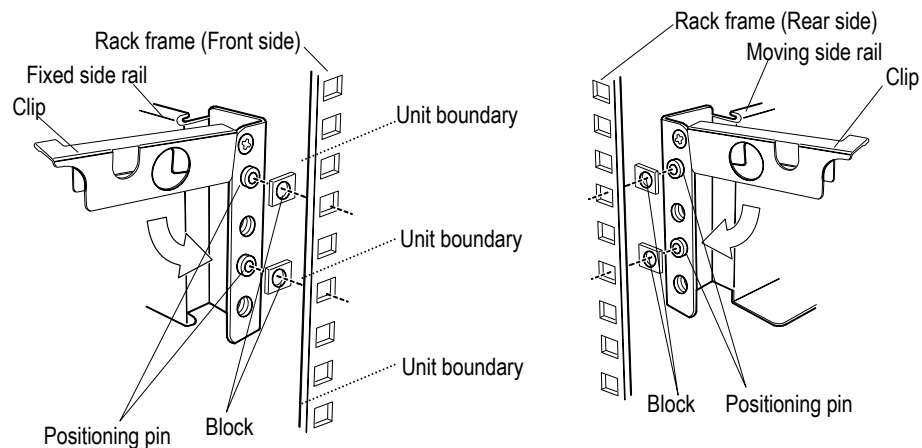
Installing Rack Rails (Square Hole) for Controller Box (2U)-2
